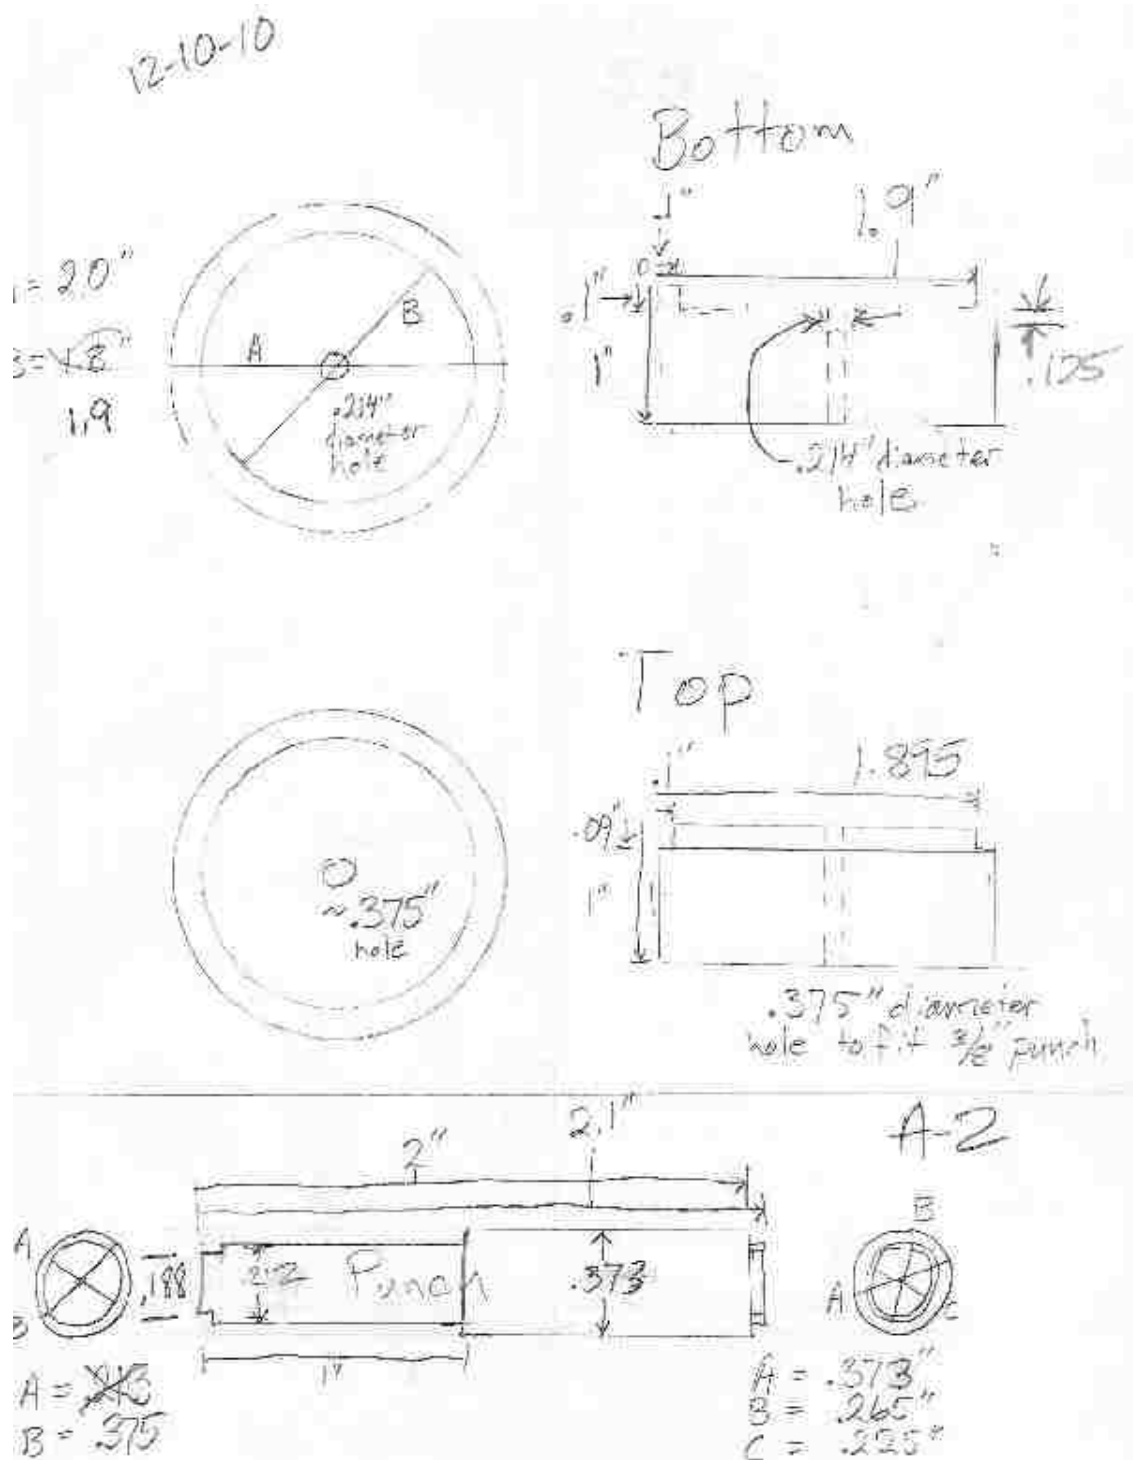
Drawing of the Tzero Hermitic Seal Press. The body of the press (top) is 2 pieces. The bottom piece is hold the sample pan and lid, while the top piece is to guide the punch for sealing the lid. The punch (bottom) is designed to seal the Tzero pan as well as to remove the sample from the press. Parts machined by B. A. Burkeen in the University of Missouri – St. Louis's Machine Shop.
